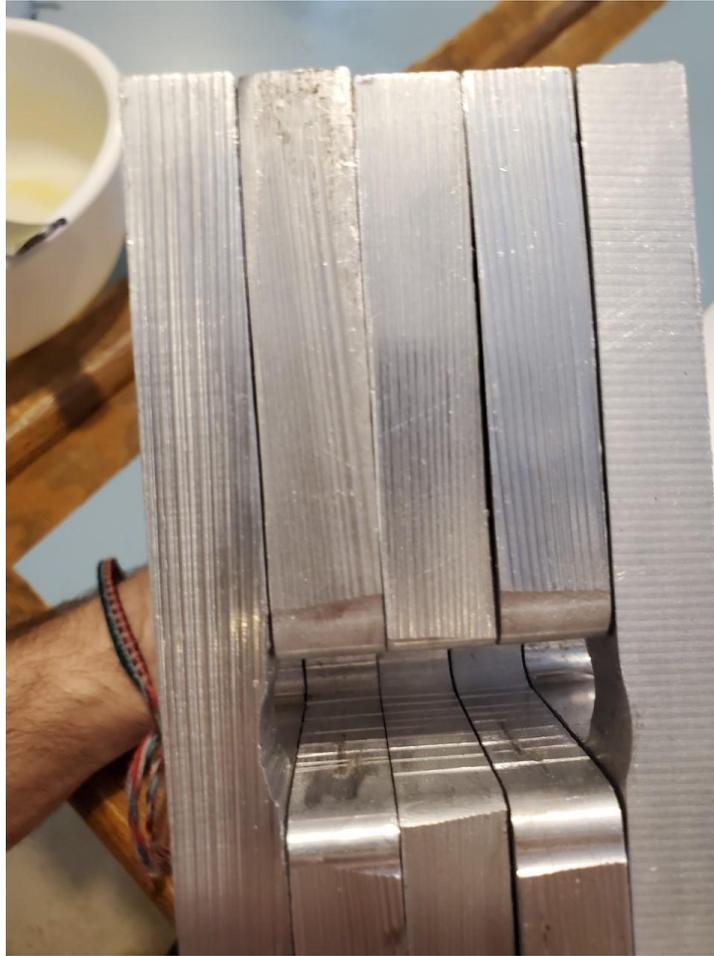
Interior of the Third Iteration Fixture Design with grooves
